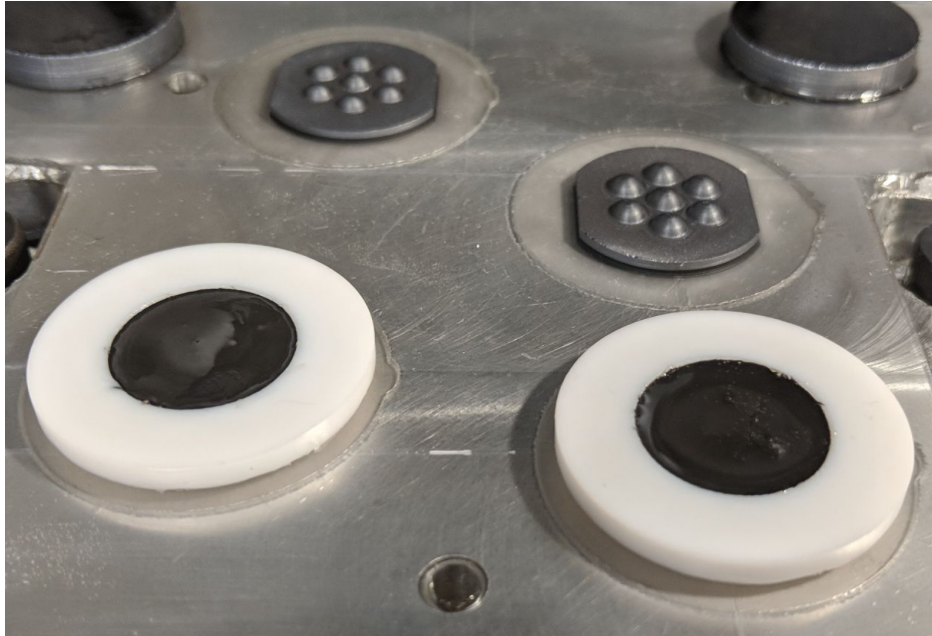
View inside a ColdQuanta CNC mill showing machined lenslets (top) and lenslets with epoxy applied in epoxy jig (bottom).
